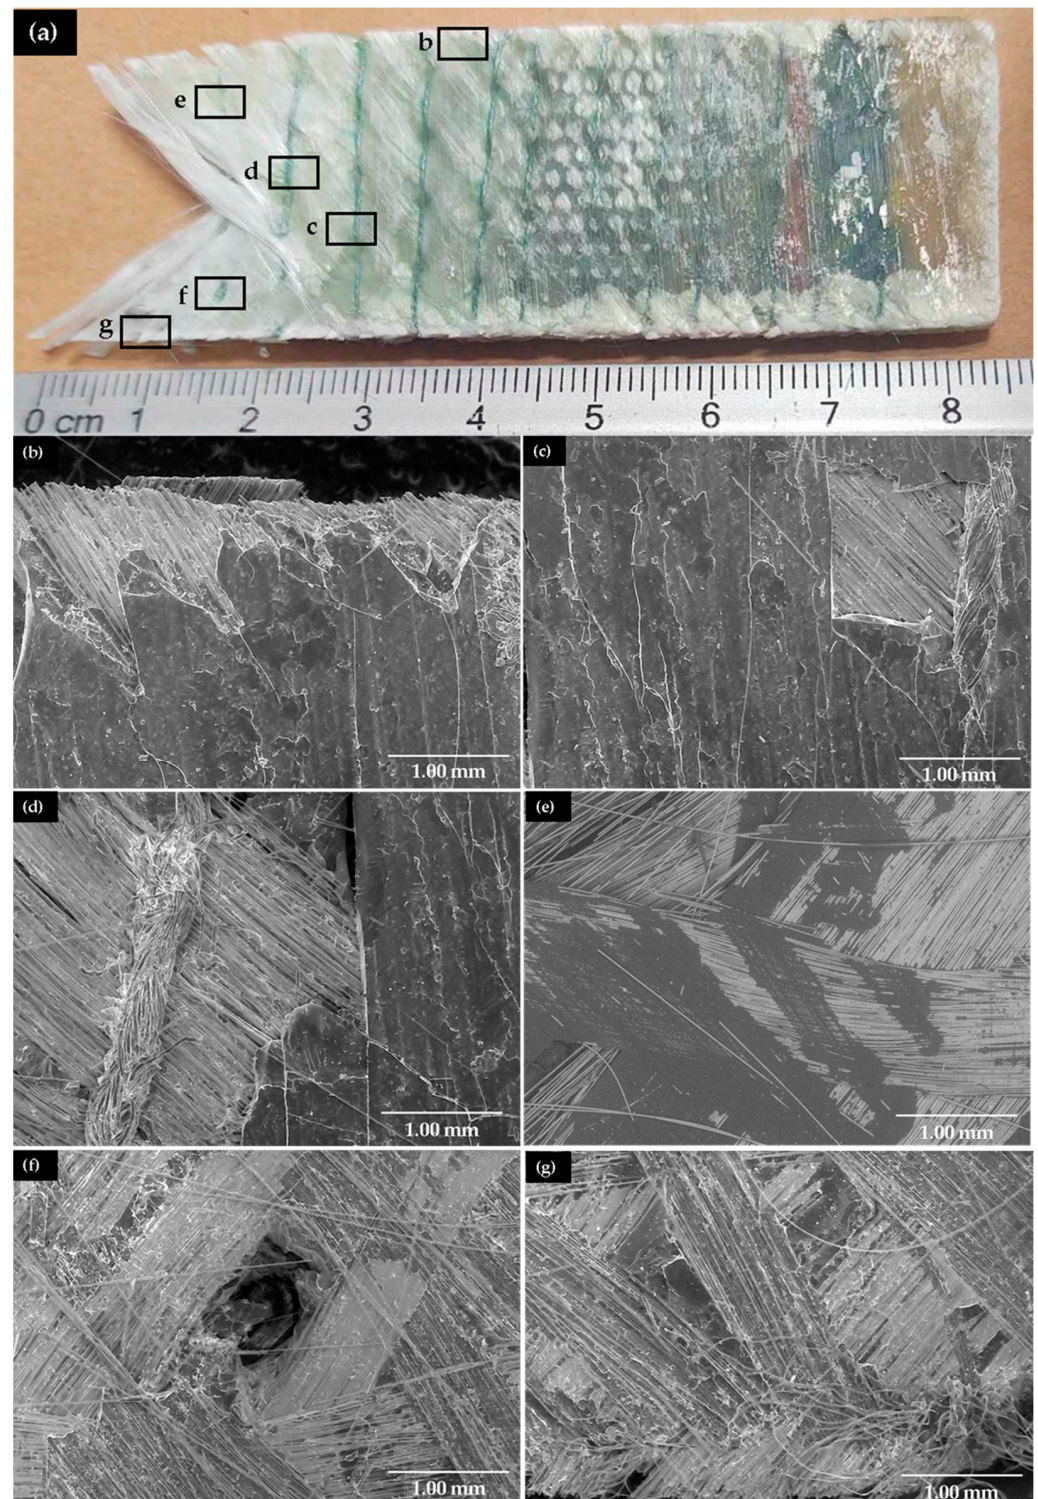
Evolution of the stitched sample fracture mechanism.
